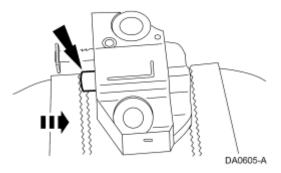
Compressing Tensioner Plunger Courtesy of FORD MOTOR CO.
